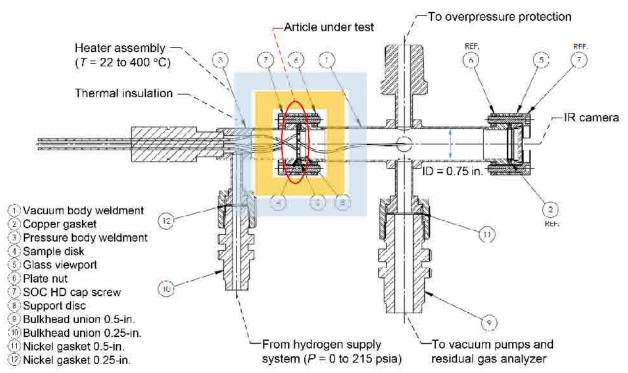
Diaphragm reactor assembly. ID is inner diameter. IR is infrared. P is pressure. SOC HD is socket head. T is temperature.
